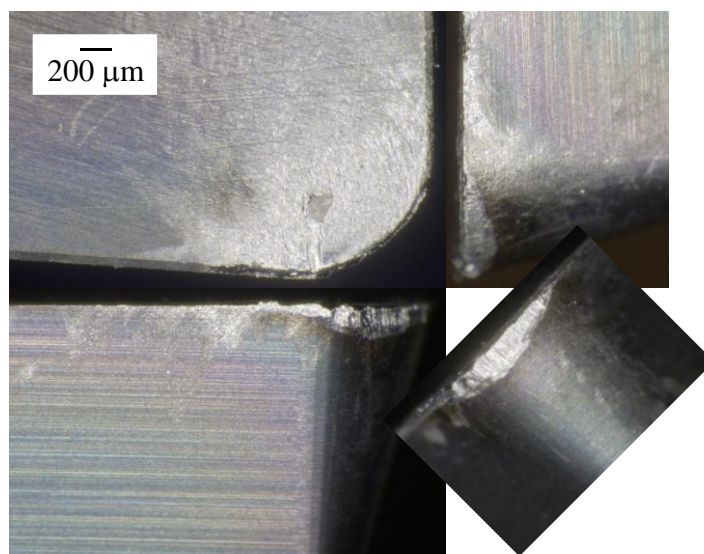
Each face of the insert in tool axis offset 9.2 mm after tool life experiment.
